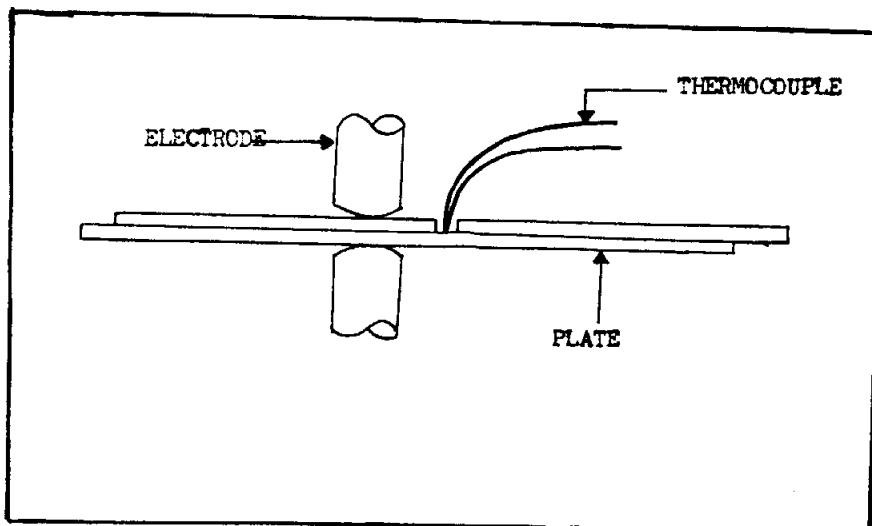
ATTACHMENT OF THERMOCOUPLE
